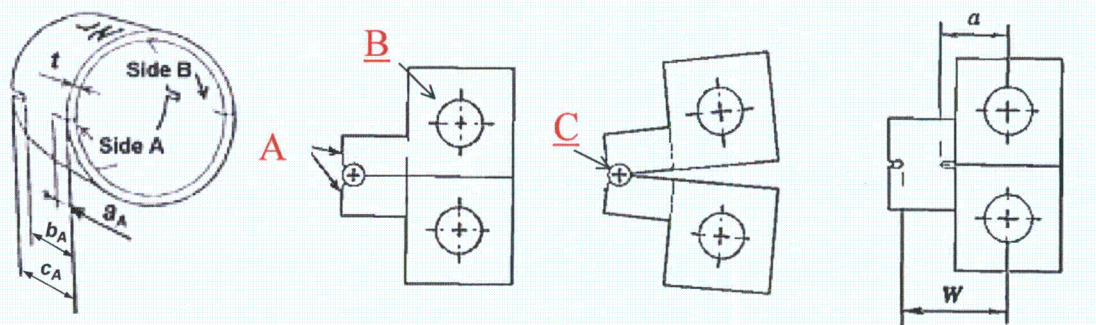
Schematic diagram of the PLT specimen, fixture, and specimen-fixture assembly.
